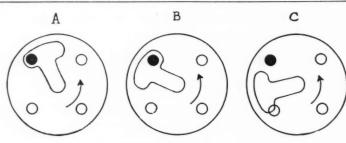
Checking distributer setting. "A" correct for advance. "B" correct for retard. "C" wrong.
